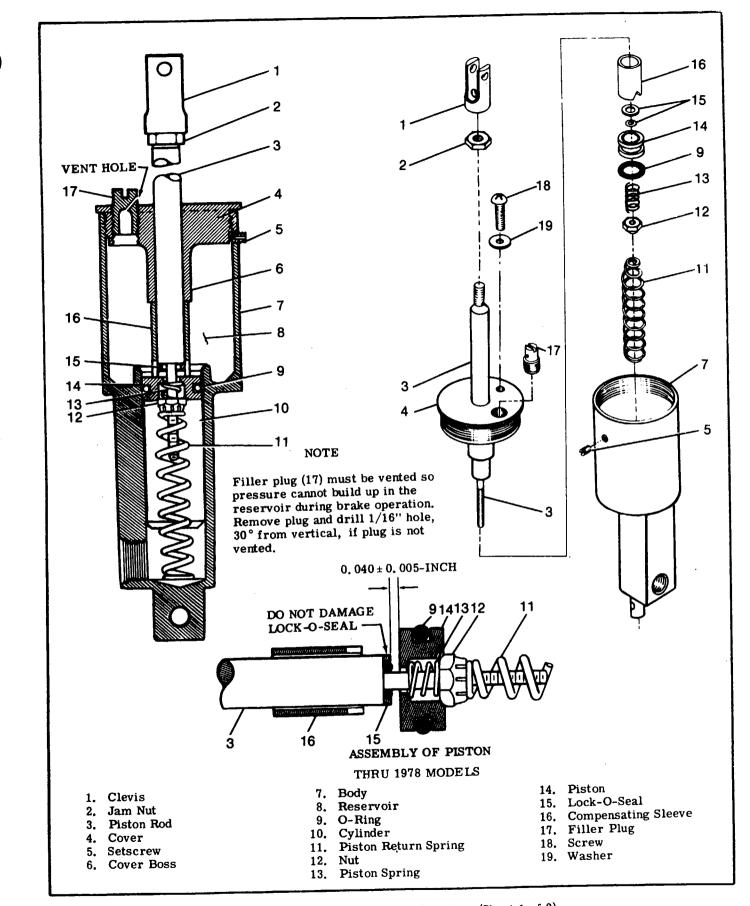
Brake Master Cylinder (Sheet 1 of 2)
